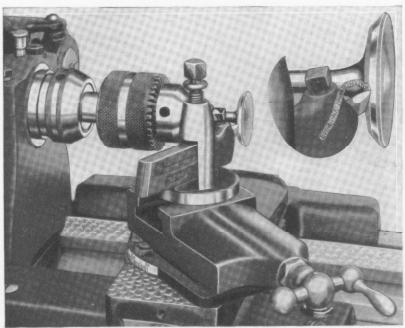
Close-up of Refacing a Valve on a 9-inch South Bend Junior Lathe
